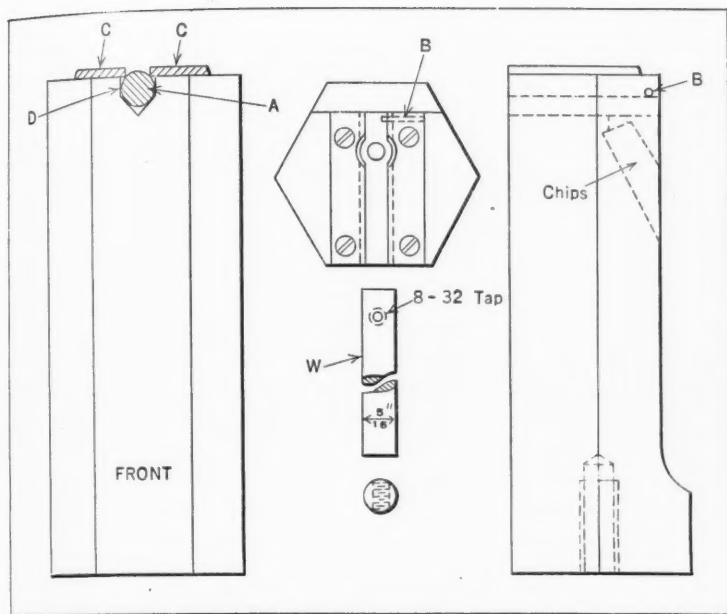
Simple Fixture for Tapping Crosswise Holes in Round Cold-rolled Steel Rods W
